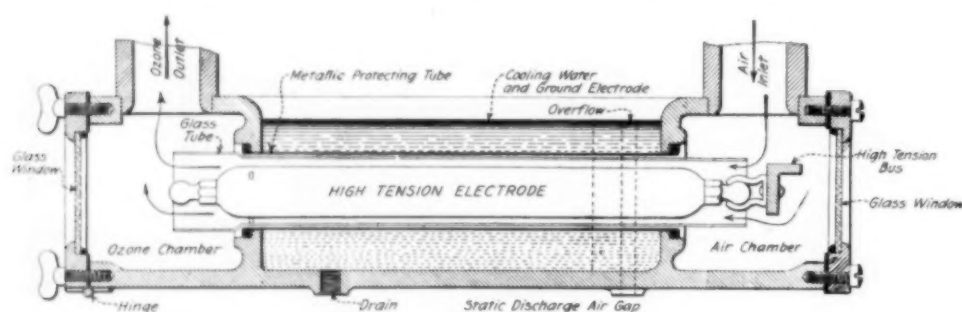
SECTIONAL VIEW INDUSTRIAL OZONATOR TUBE
